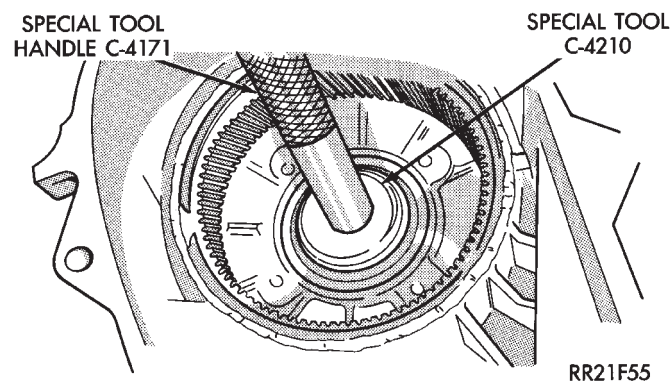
Removing/Installing Front Output Shaft Bearing Snap Ring
